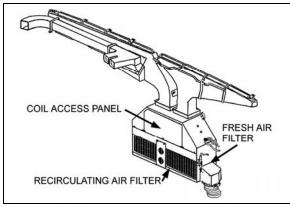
DRIVER'S HVAC UNIT COIL ACCESS PANEL
